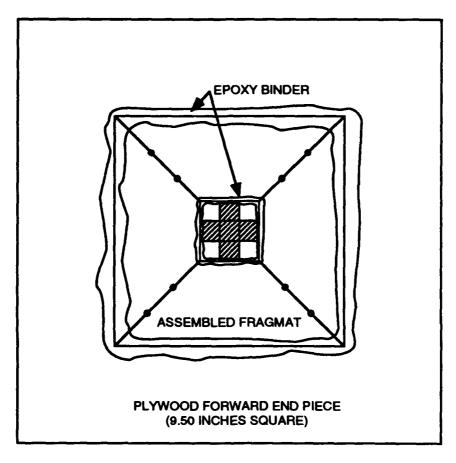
Assembled Fragment Projector Forward End Piece.
